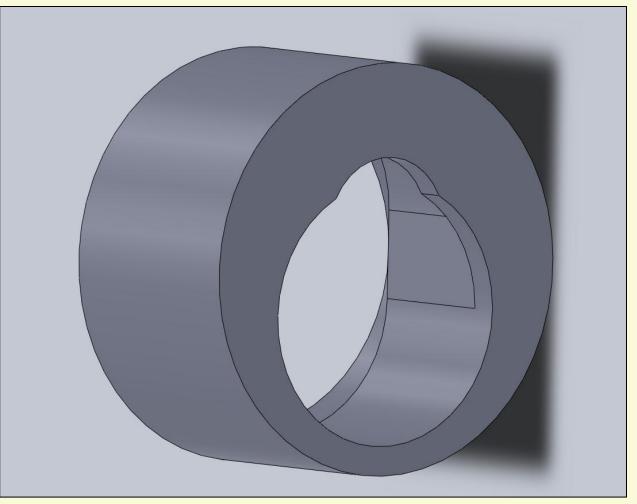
SolidWorks model of final design focused on abutment insert hole.
